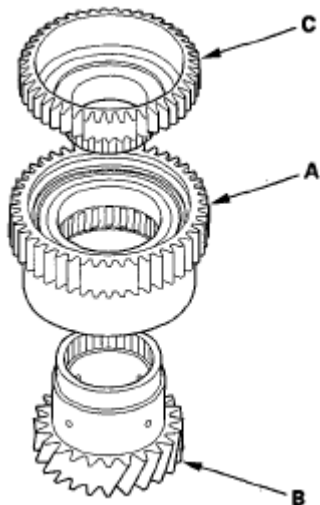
Identifying 1st Clutch Hub, 1st Gear And 1st-Hold Clutch Hub
